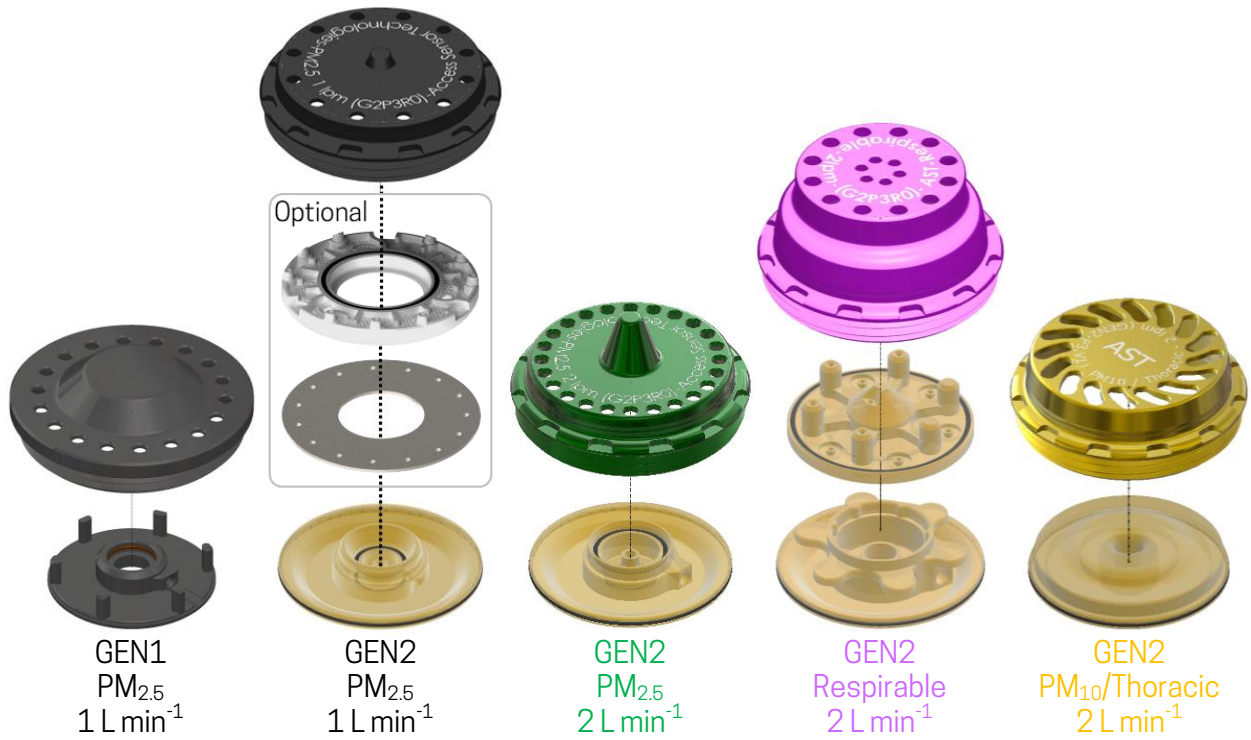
Reassemble each inlet by installing the insert piece(s) into the aluminum cap as shown.
